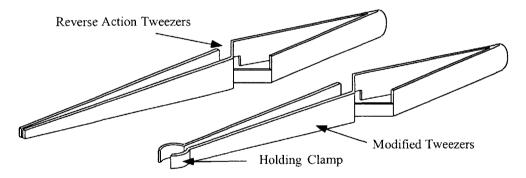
Modified Tweezers, Used as a Holding Clamp.
